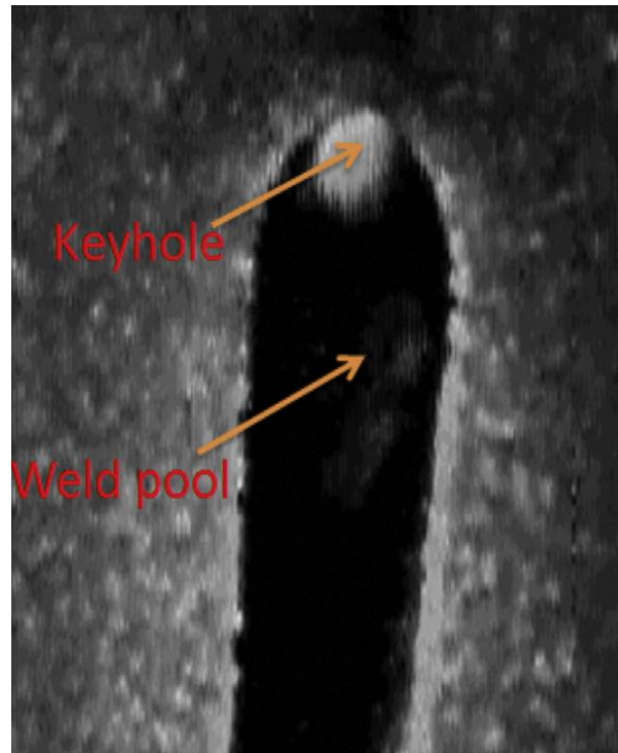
Simultaneous imaging of weld pool and keyhole from backside
